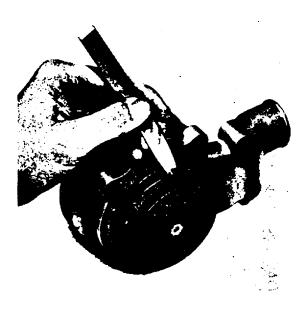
Checking Impeller to Water Pump Body Clearance.
